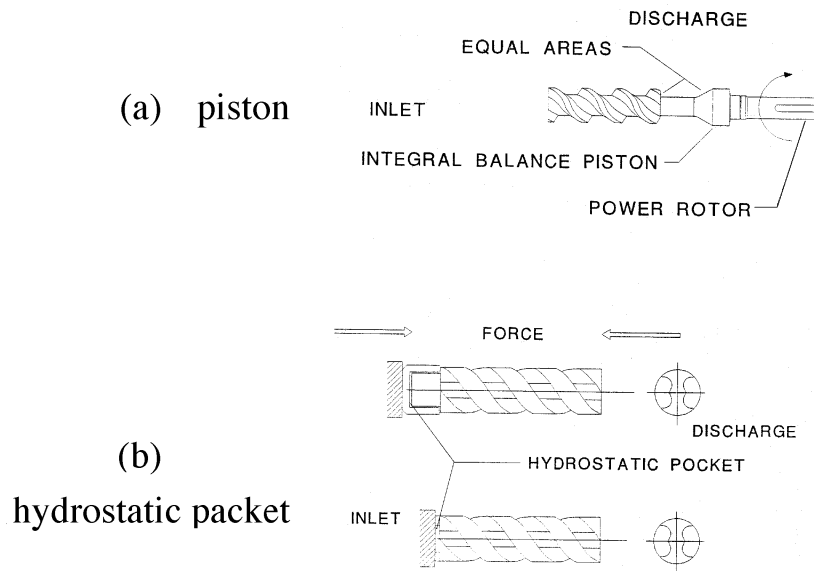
Hydraulic thrust balancing. (Courtesy of IMO Pump.)
